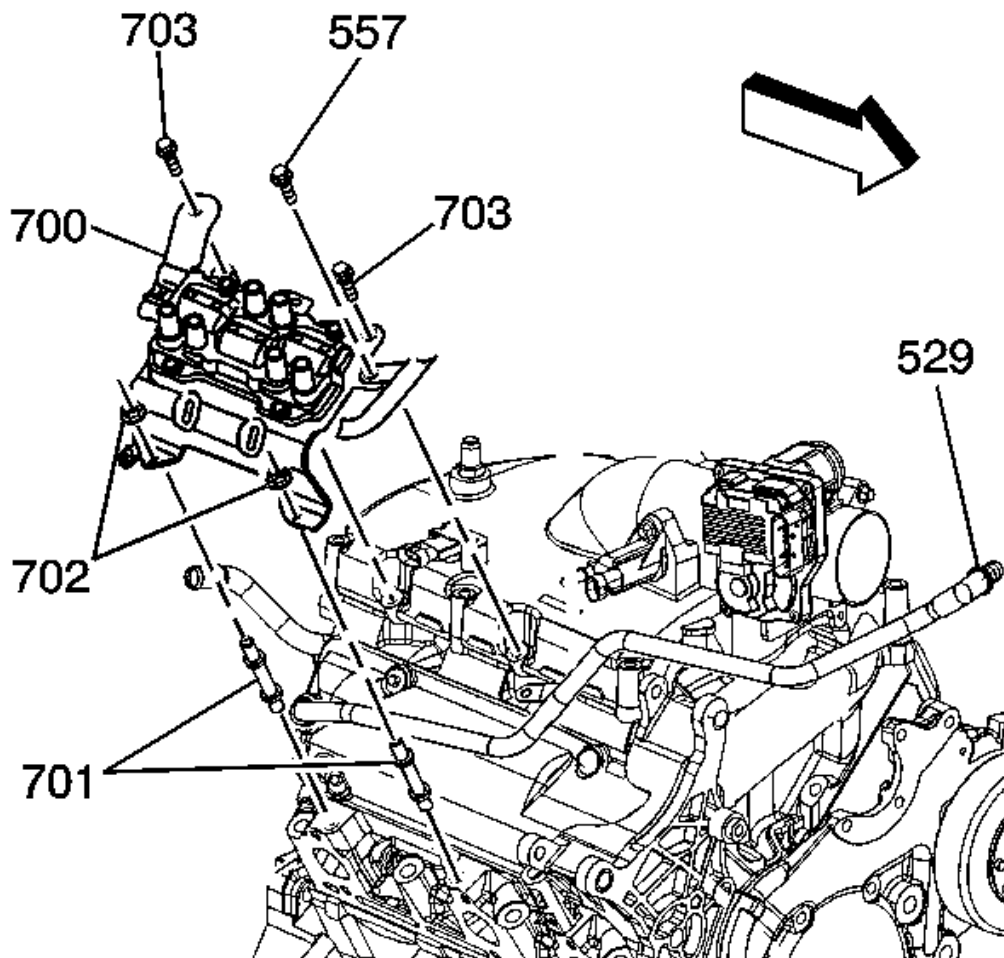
View Of Ignition Module & PCV Fresh Air Tube
